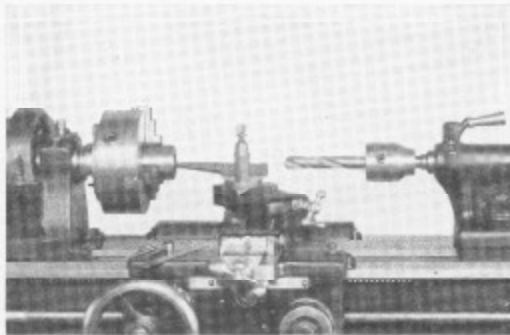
Making a Steel Bushing held in a 3-Jaw Universal Chuck. The Drill is held in a 2-Jaw Drill Chuck
